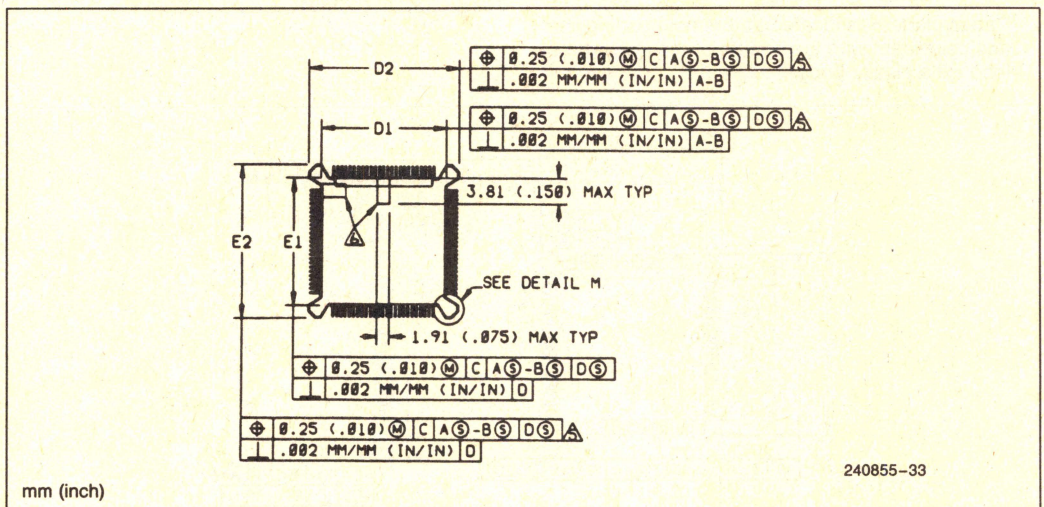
Detailed Dimensions of the 82750DB in the 132-Lead PQFP Package—Molded Details
